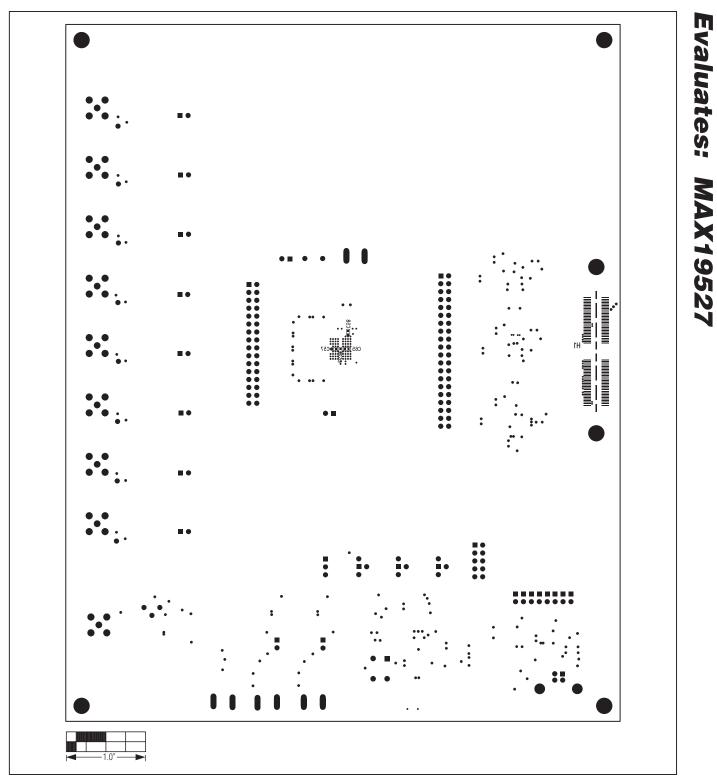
MAX19527 EV Kit PCB Component Placement Guide—Solder Side
